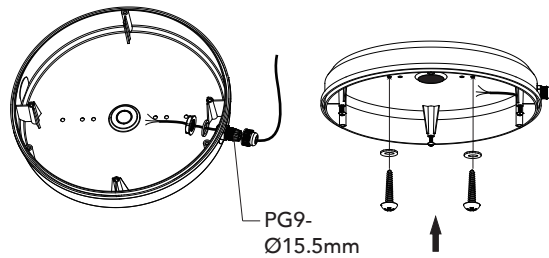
, Where fitting must be weatherproof, apply silicon sealant to fixings. Mark appropriate fixing points on wall or ceiling; check that fixings will not impinge on concealed cables or pipes before drilling holes.
